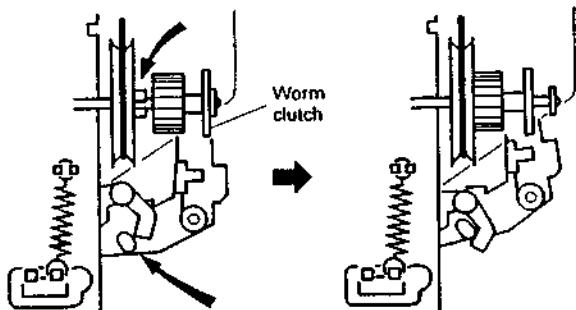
(a) Not locked Fig. 1-1-8(b) Lock engaged
